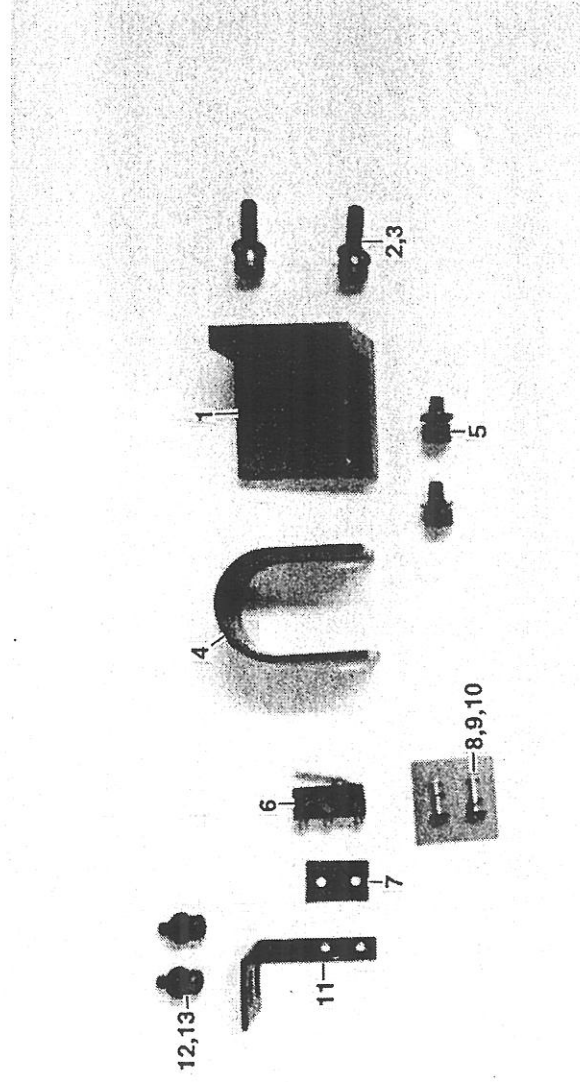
B MACHINE -BASE PARTS: X-Axis Limit Switches
